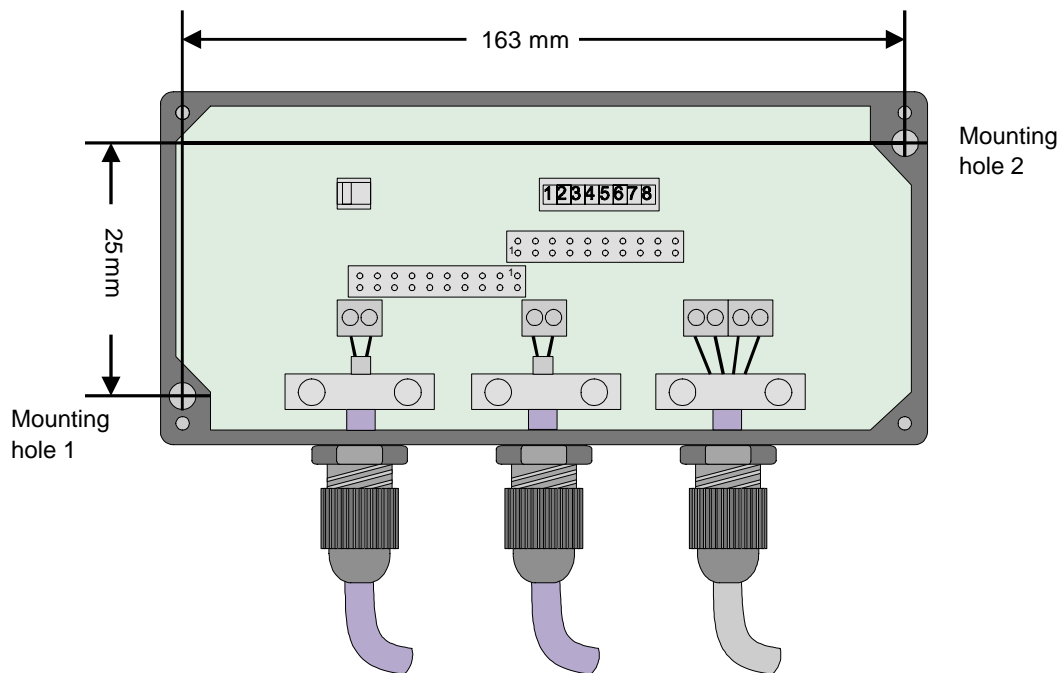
Dimensions for Securing the PROFIBUS ILM to a Mounting Plate
